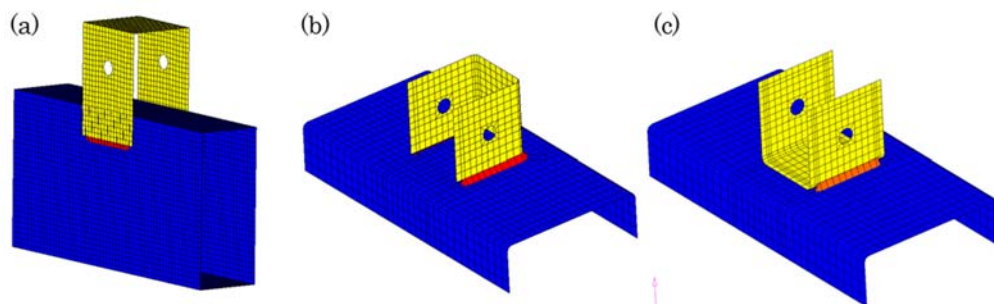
FE models of arc-welded component specimens. (a) Lap-joint, (b) T-joint, (c) flare-joint.
